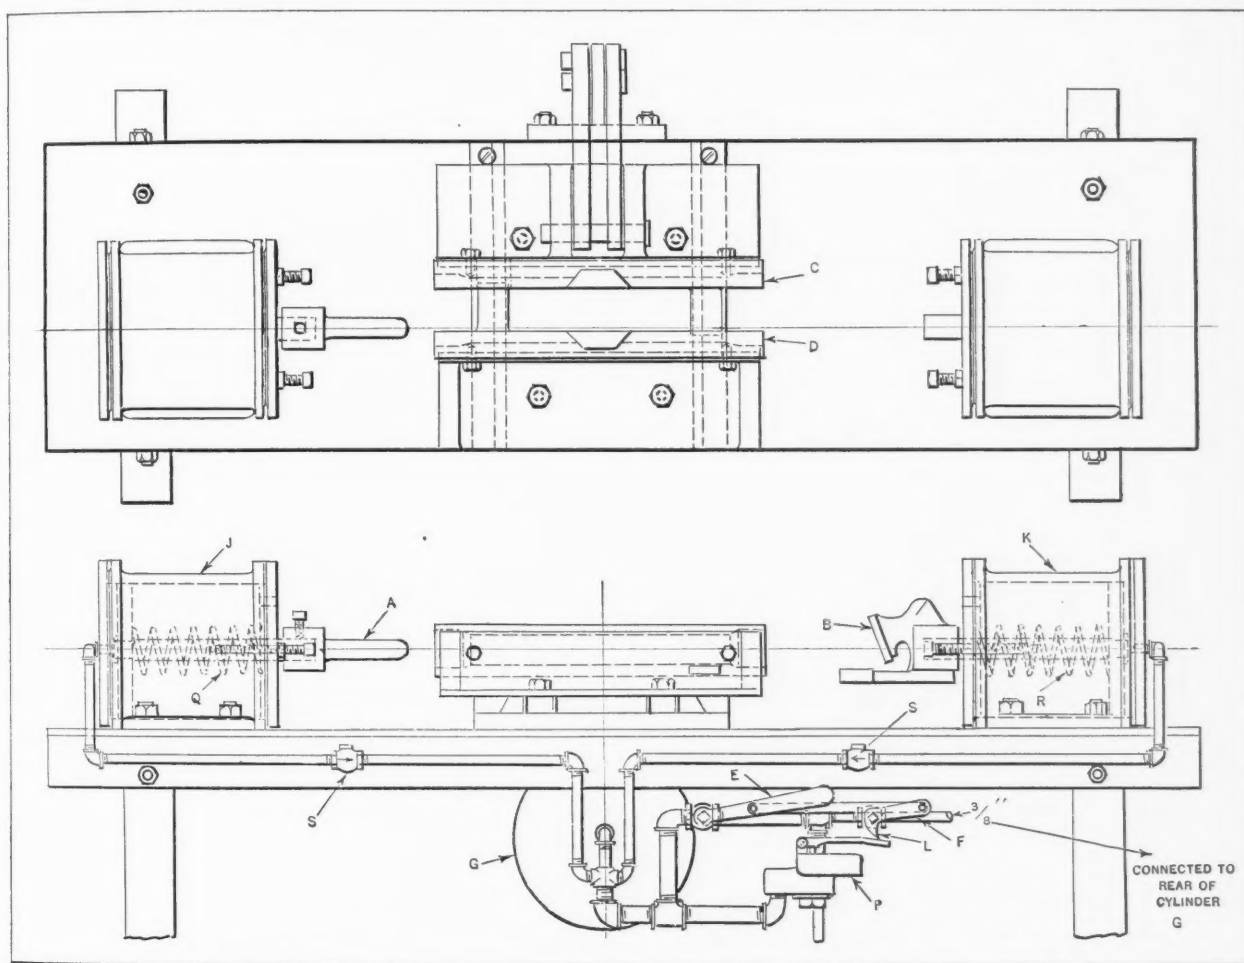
Front and Plan Views of Machine Shown in Fig. 3
